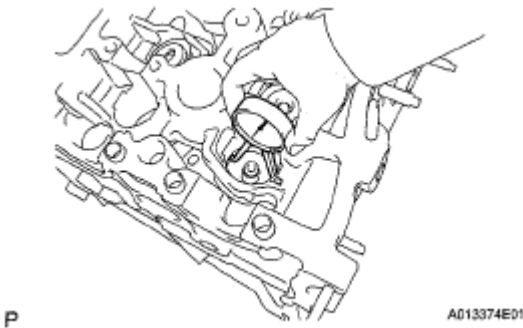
Measuring Valve Lifter Bore Diameter Of Cylinder Head
